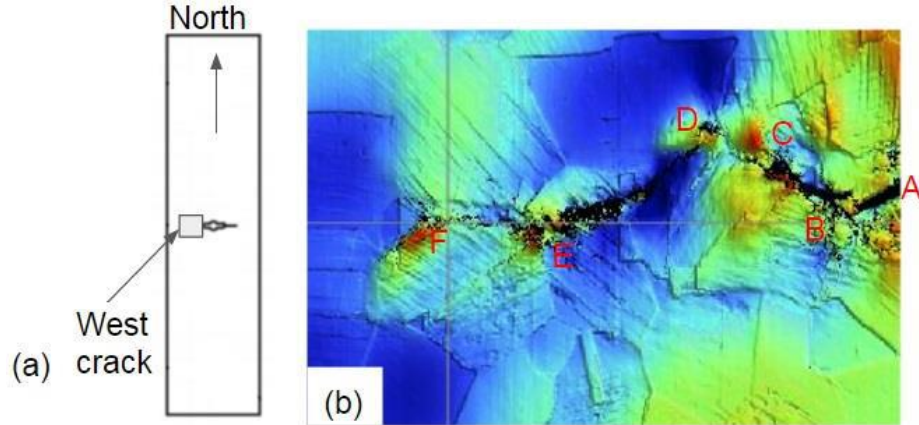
Location of the “west” crack a) Area of crack b) WLI of the crack viewing zone.
